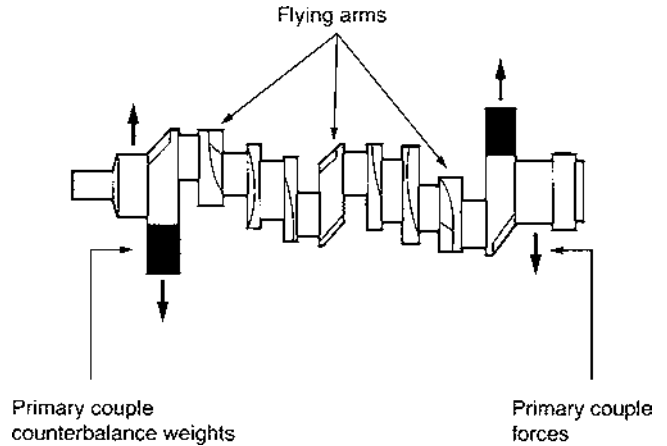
Balancing arrangements for a 60° V6 engine crankshaft with four main bearings
